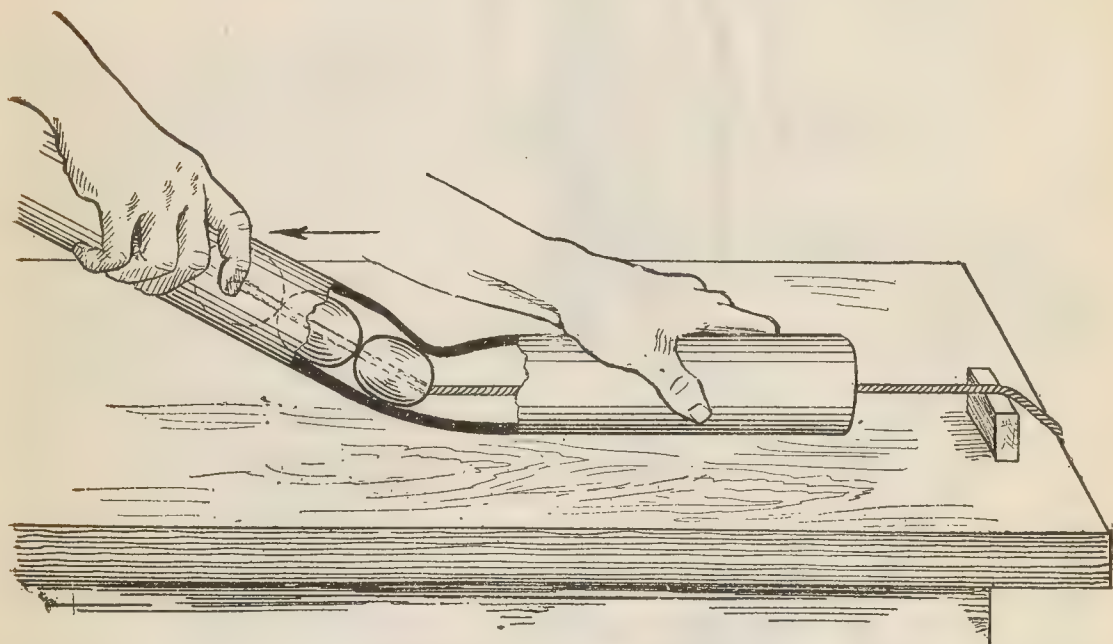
,517.—*Bending with bobbins, 3.* Removal of deep dent by pulling through a string of bobbins of graduated sizes.
